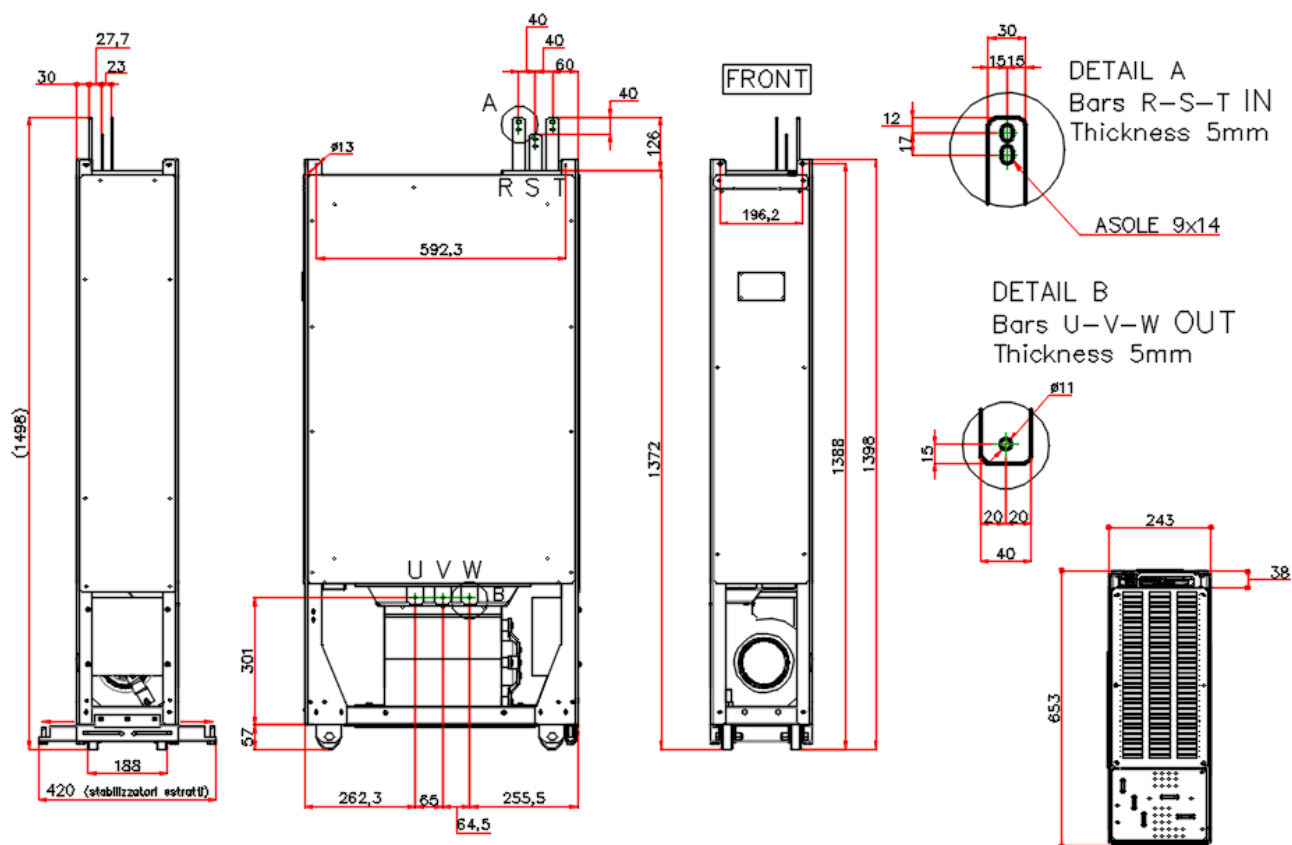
Frame SDS.2 overall dimension with air cooling system
